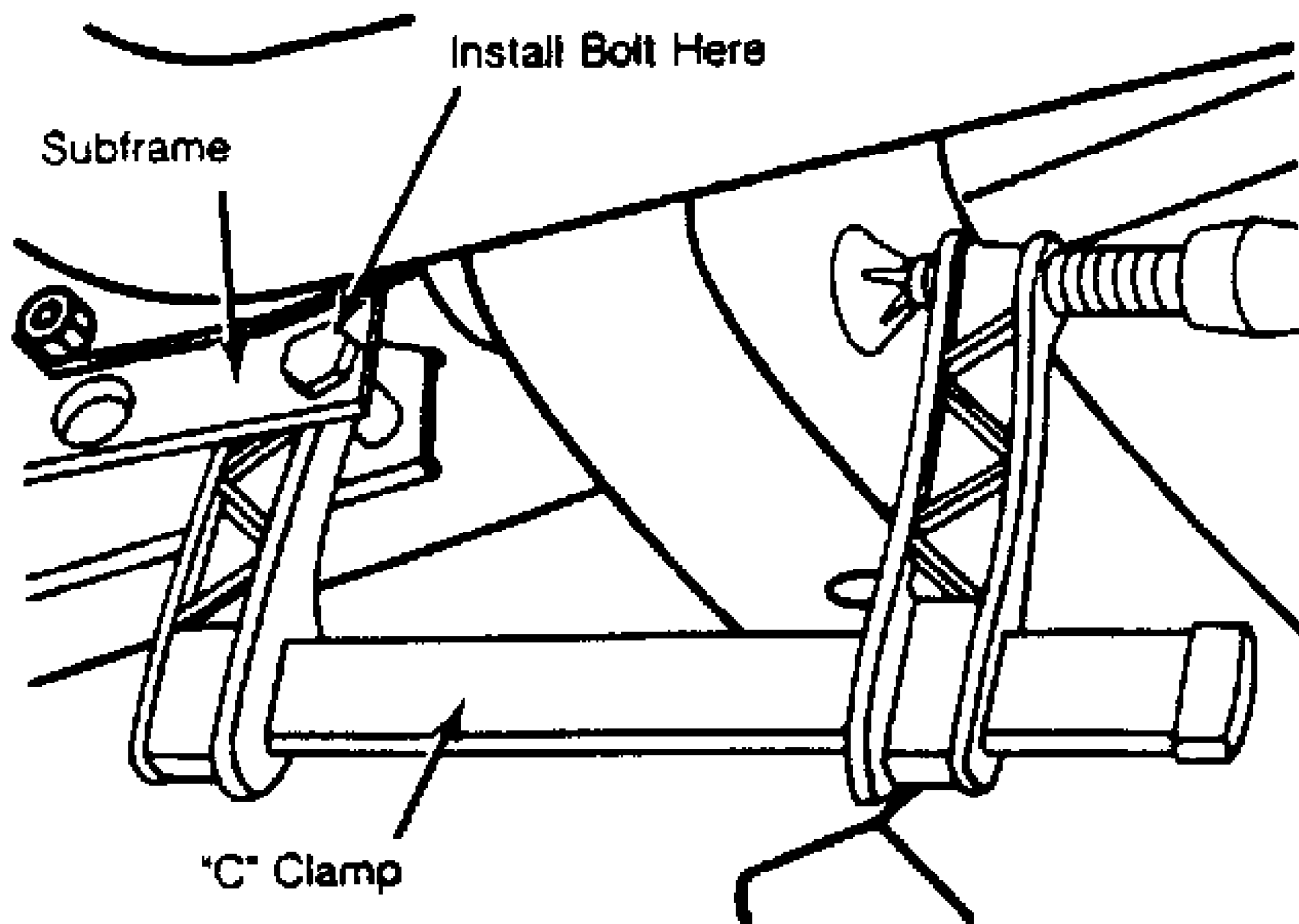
Removing Subframe From Mounting Bracket (Conventional)
